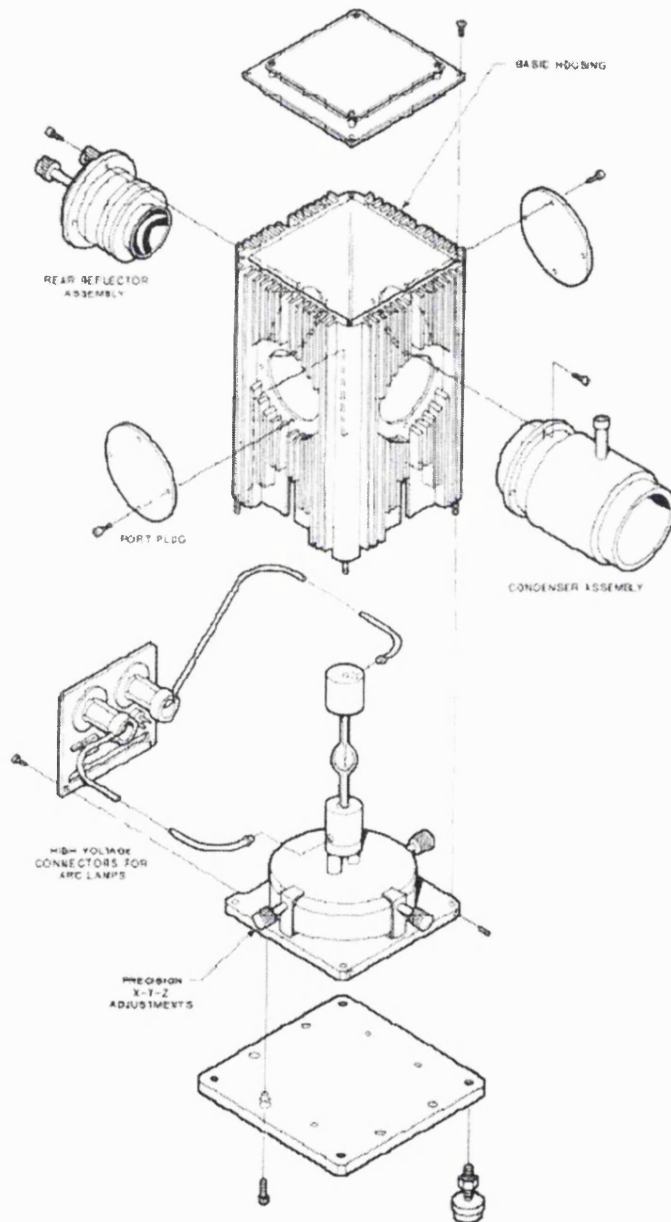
Exploded view of a typical lamp housing with an arc lamp
